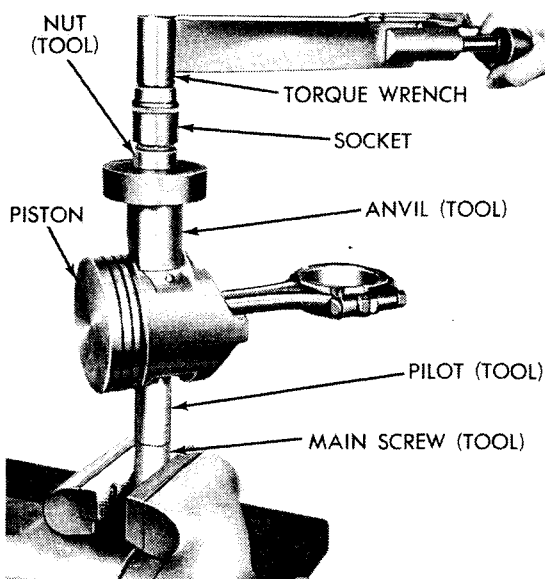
Testing Fit of Piston Pin in Connecting Rod
